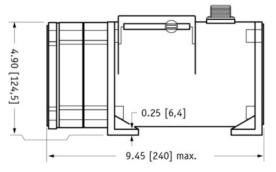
Outline Drawing (36 oz. cable tension only)
